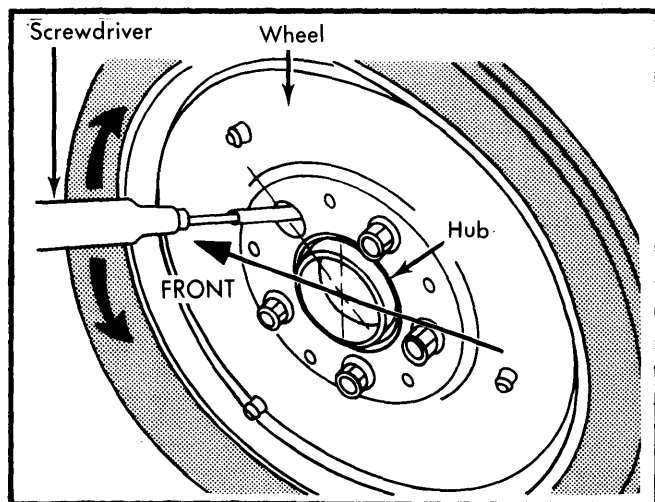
Fitting Parking Brake Adjuster Tool Into Adjusting Mechanism
